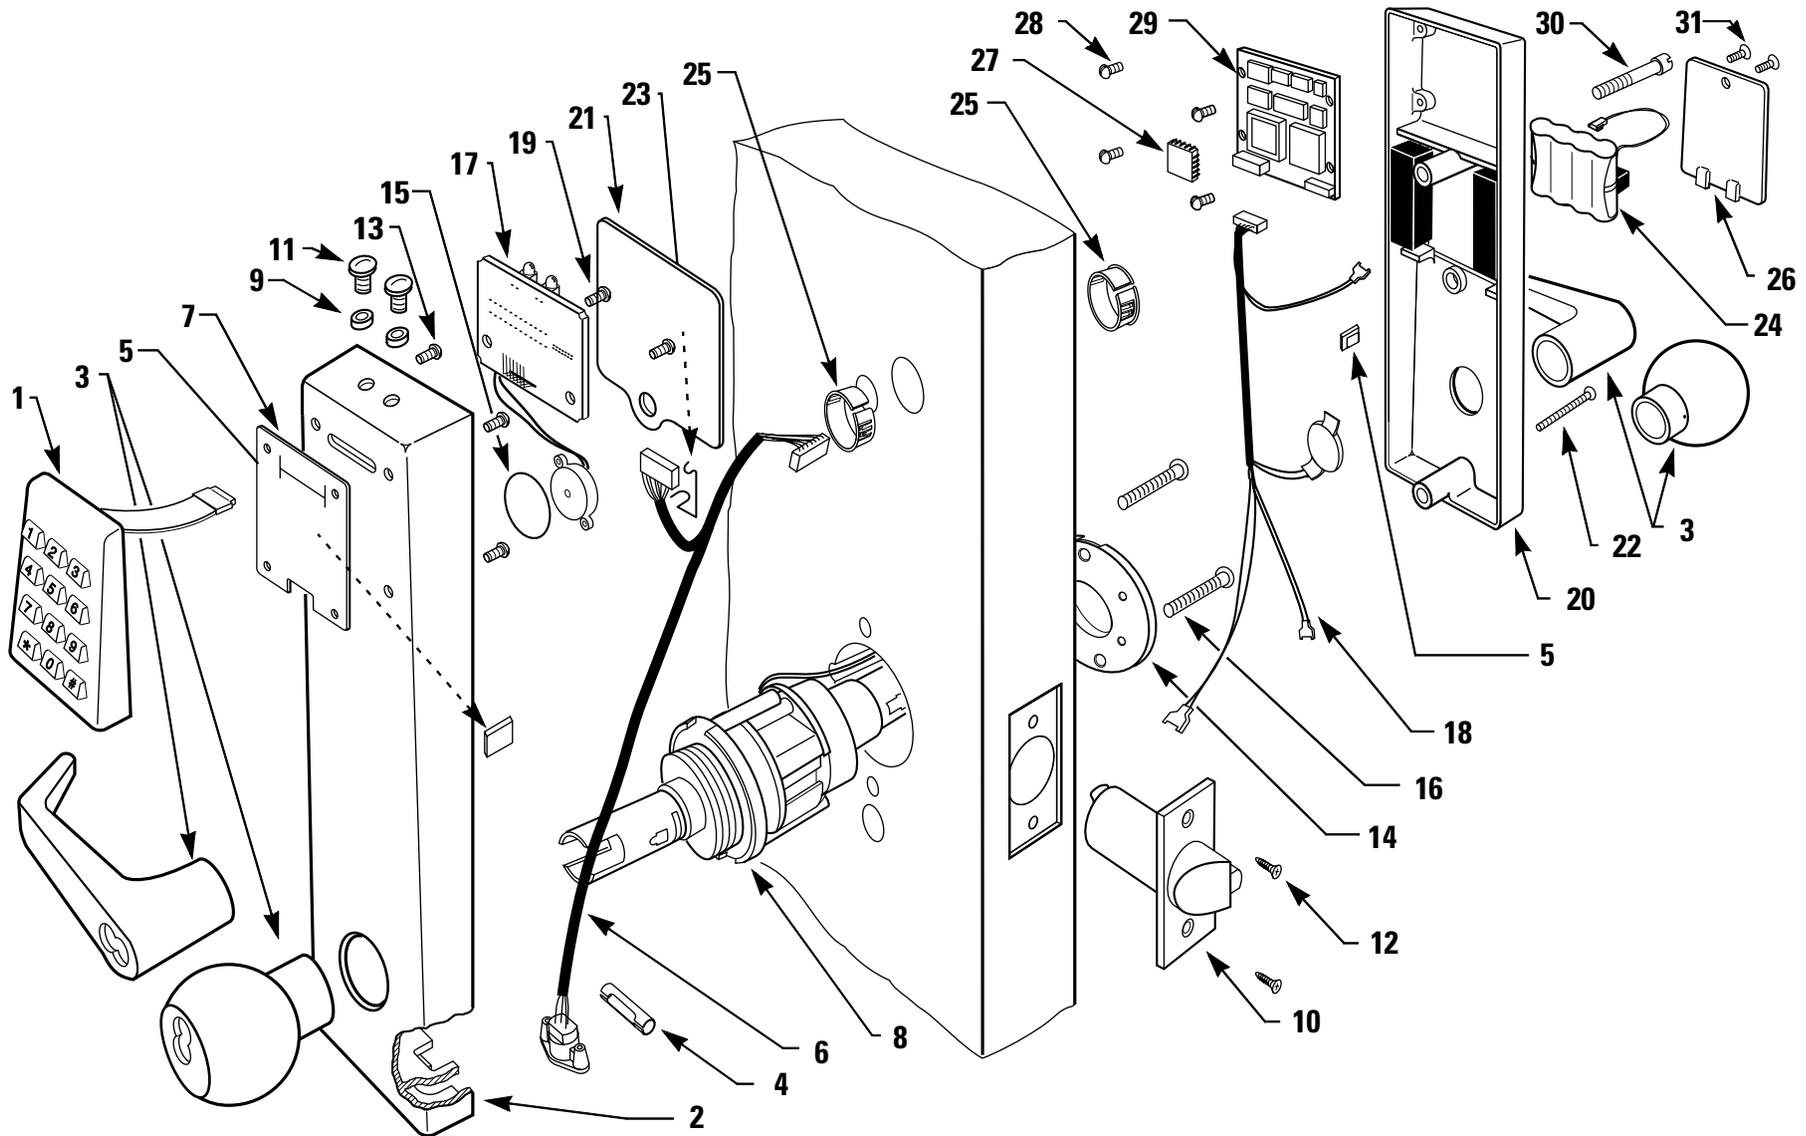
8KV, 9KV keypad trim exploded diagram
